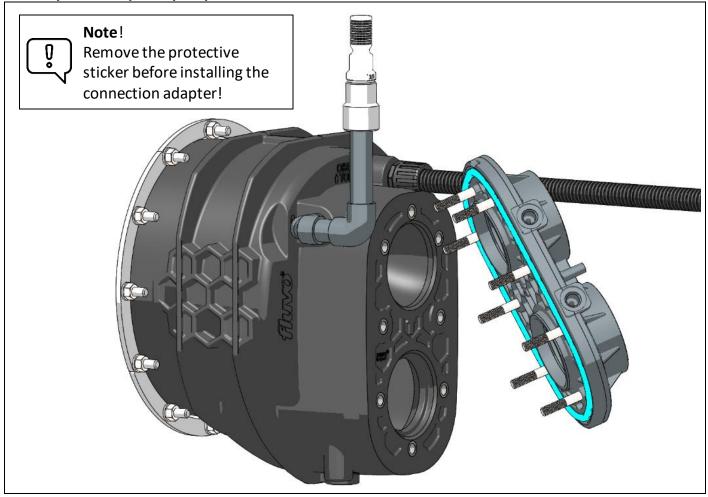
Put on pipe connection adapter incl. moulded seal (part of the pump kit)
